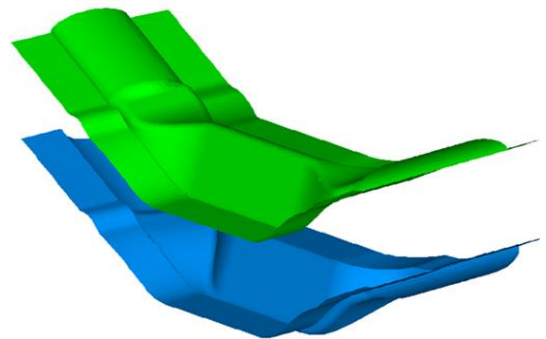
Geometry of hydro-forming die for rear cross member part.
